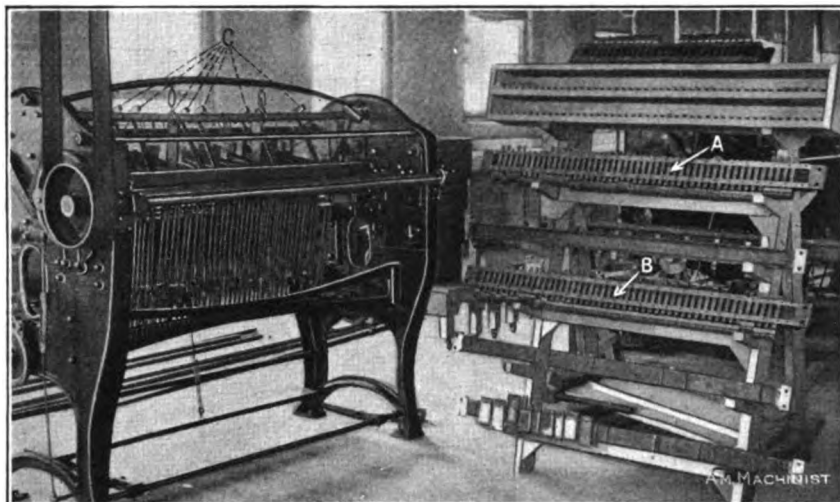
WOOD-RULE NUMBERING AND DIVIDING MACHINE
